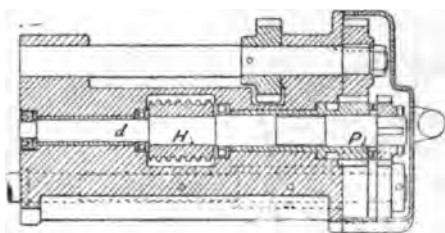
Horizontal Section through Worm, &c., driven by Telescopic Feed Shaft, B. & S. Miller.
